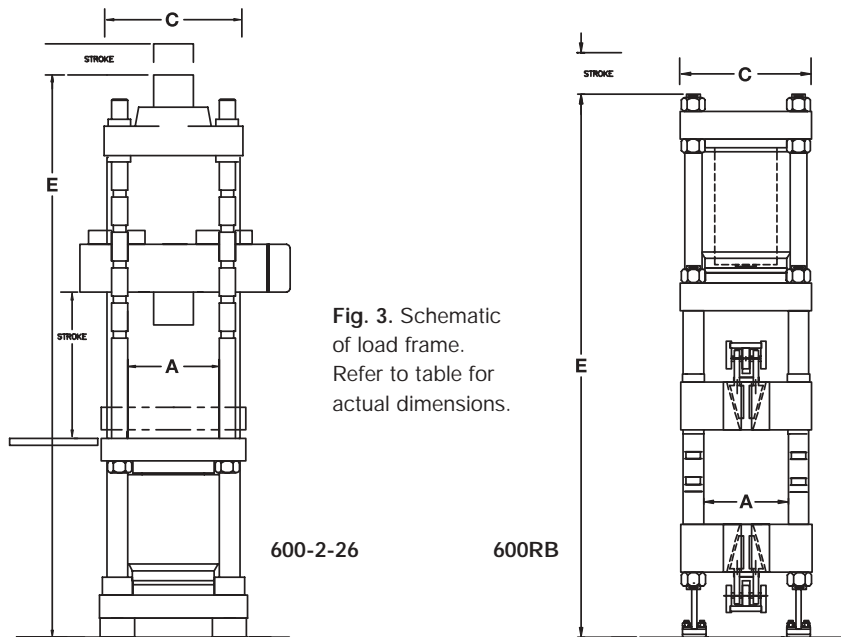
Schematic of load frame. Refer to table for actual dimensions.
